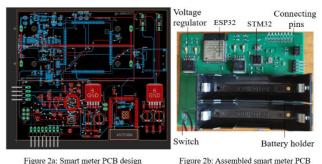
smart meter PCB design Figure 2b: Assembled smart meter PCB: Figure 2. Assembled smart meter PCB: (a) Picture of smart meter PCB designed in Eagle, and (b) Picture of smart meter PCB after assembly of components
